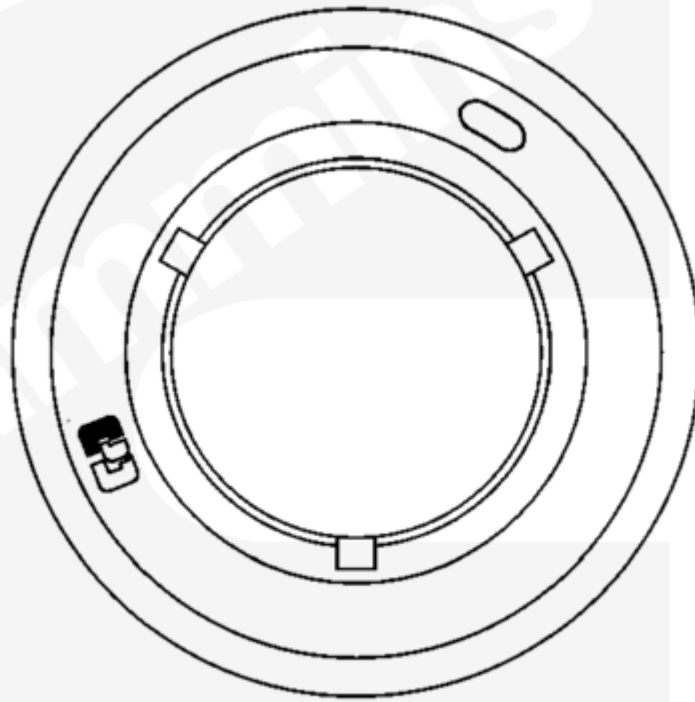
, Machine Old Water Pumps to Accept New Seal Size
